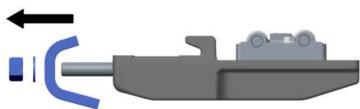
Preparation of the ARV; disassembly of clamping piece
